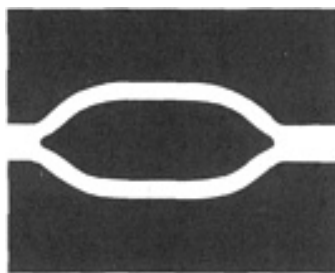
CROSS SECTION OF AN ALUMINUM SOLAR COLLECTOR PANEL PRODUCED BY THE ROLL WELDING PROCESS
